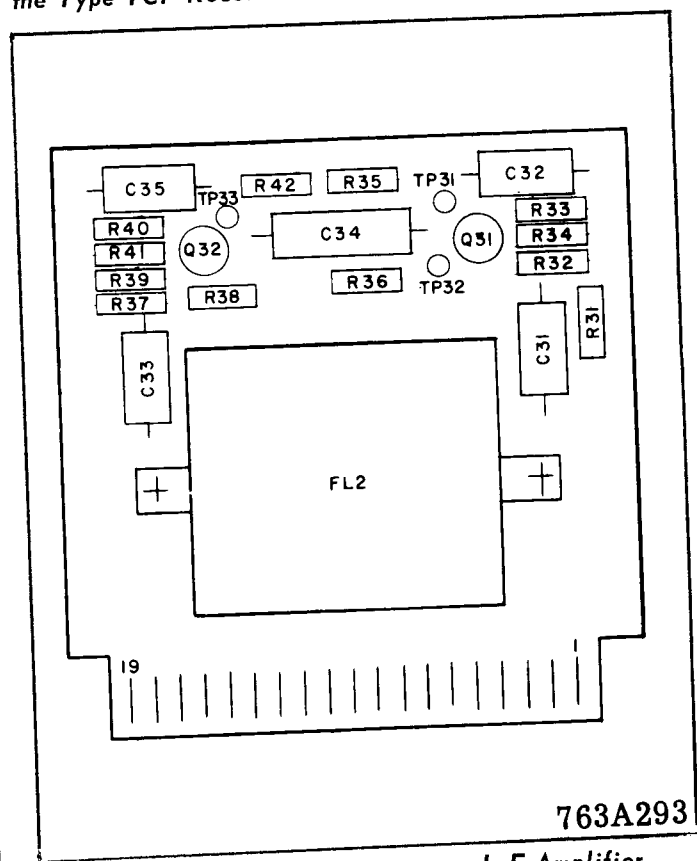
Component Locations on I-F Amplifier Printed Circuit Board.
